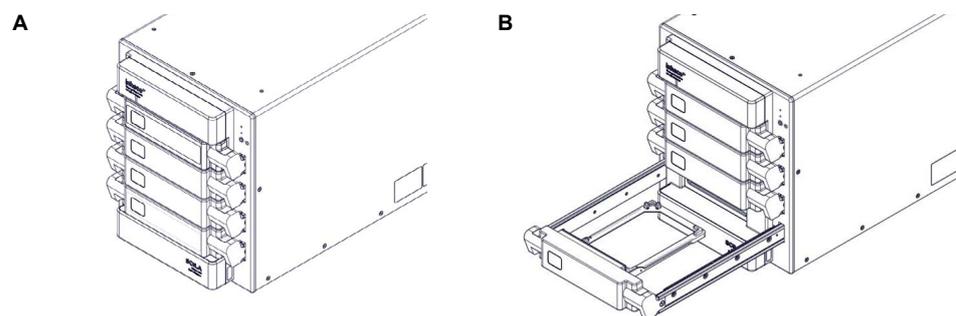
SCILA Drawer 1 closed position (A) and open position (B)
